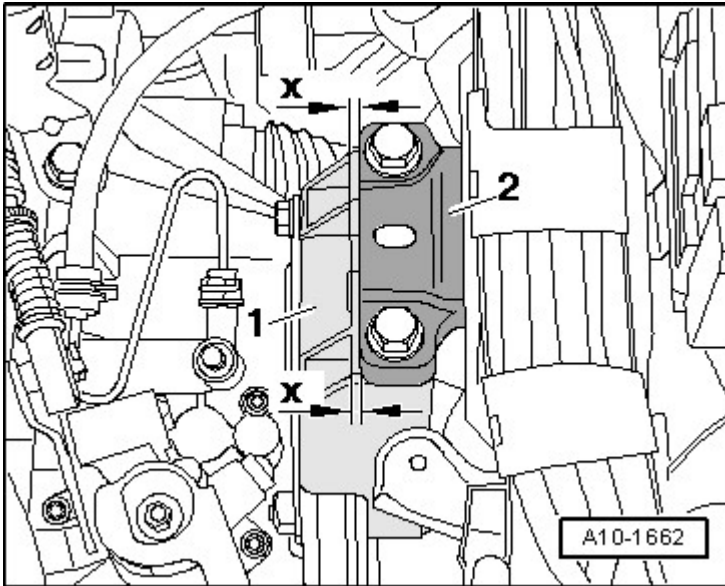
Checking Dimensions At Engine/Transmission Assembly Mounting
